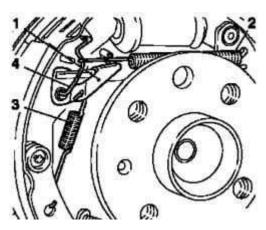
Install the adjuster lever and spring: 1 - the adjusting lever, 2 - upper spring, 3 - spring, 4 - holding clamp
